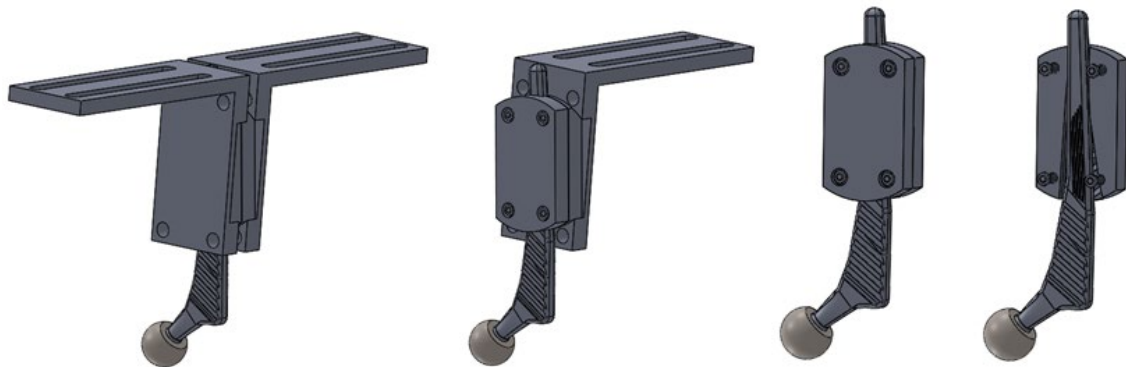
The fixing assembly of the prosthesis stem (some parts were artificially removed)
